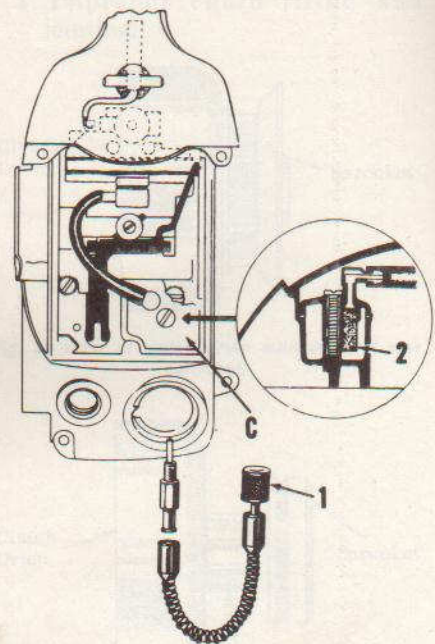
The first fuel filter (1) is located in the tank. Be sure that gasket located under cover (C) doesn't leak, when servicing the second filter (2).
